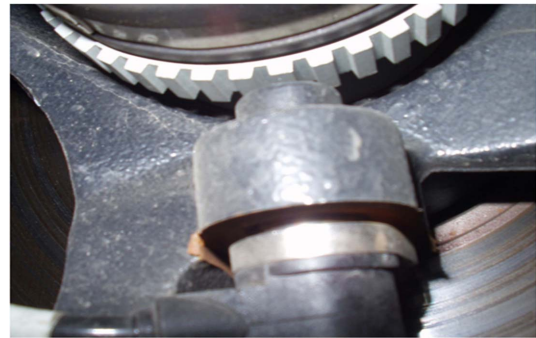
Example of an excessive gap between wheel speed sensor and tone wheel.
